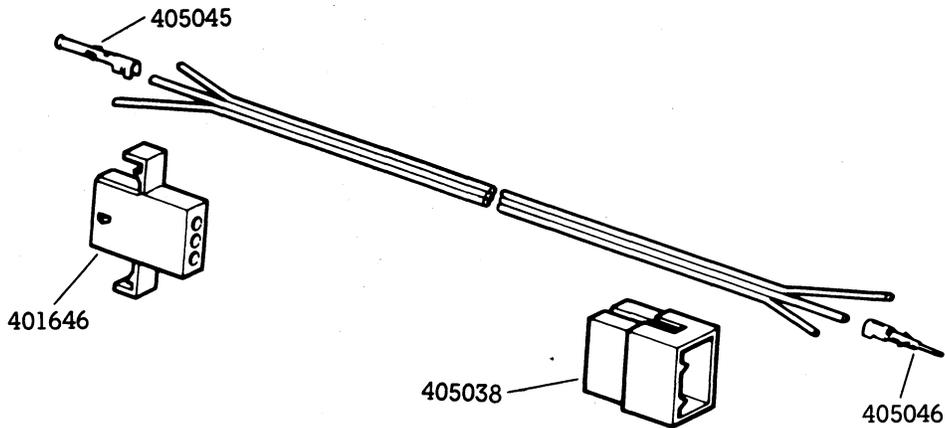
405049 AC Input Cable Assembly – Printer Under Monitor Cabinet
